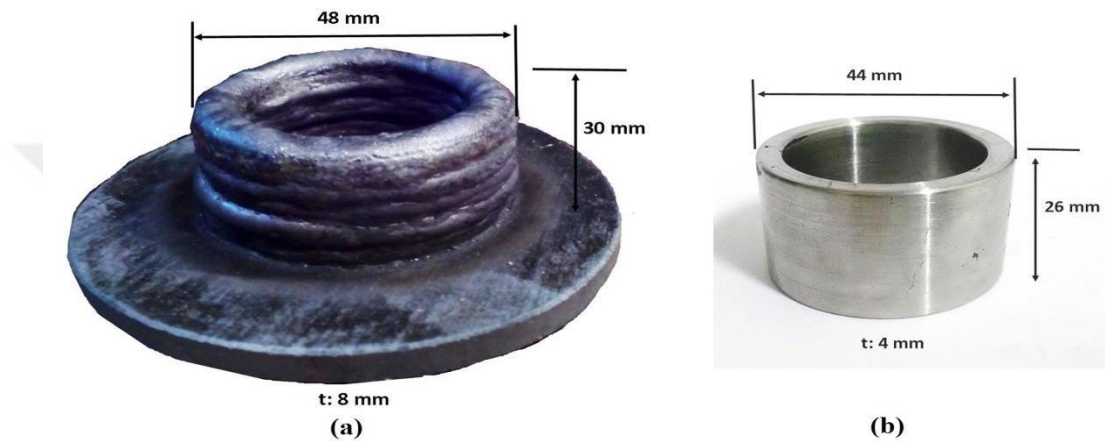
A sample cylindrical geometry made by CMD machine (a), a sample after machining (b)
